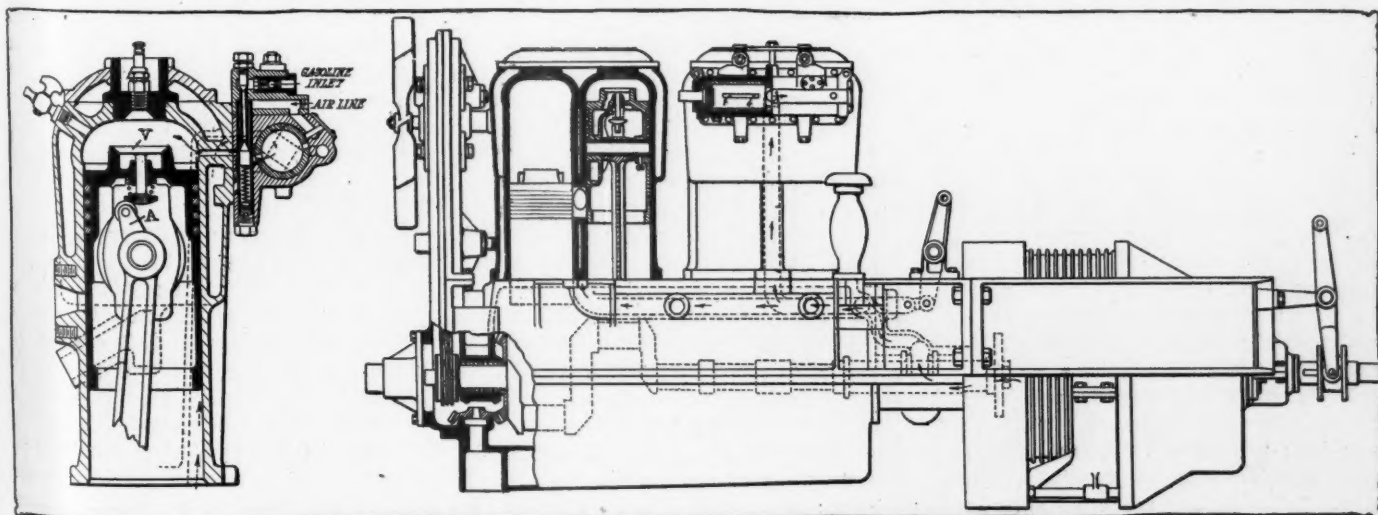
END AND SIDE SECTIONS OF THE CHURCH PNEUMATIC POWER PLANT
